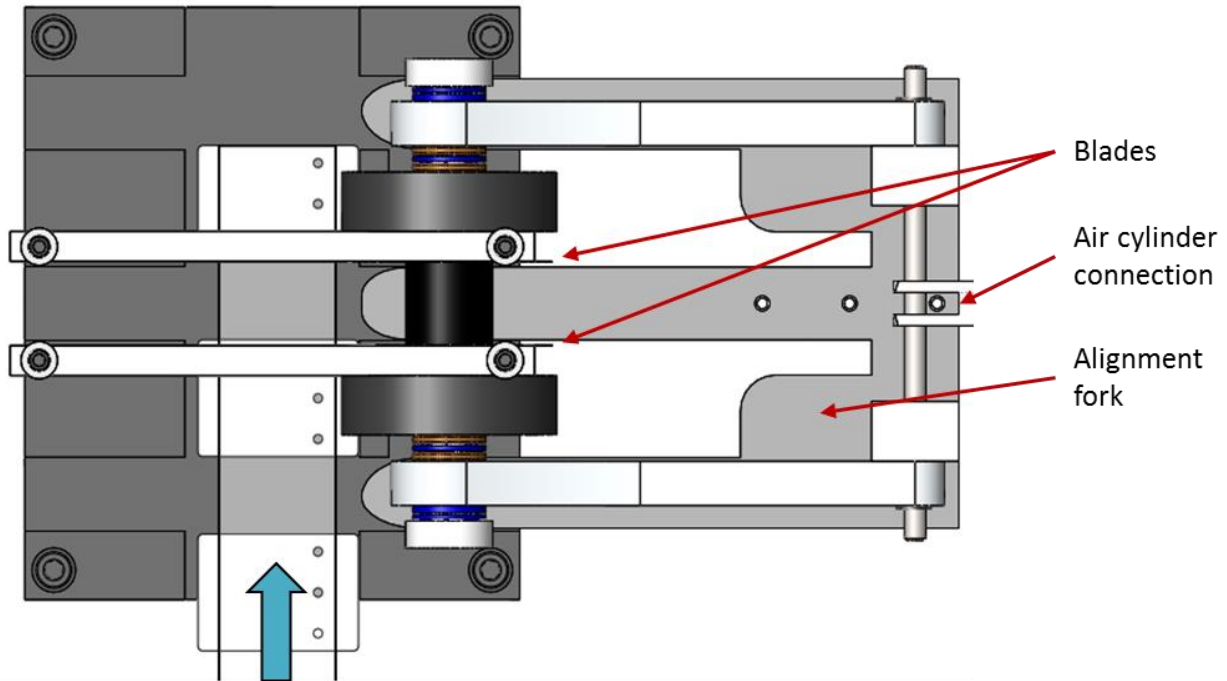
Top view of the tape cutting assembly. The chips move from bottom to top. An air cylinder moves the alignment fork from right to left to push the chips into position as the blade assembly rolls forward to cut the tape.
